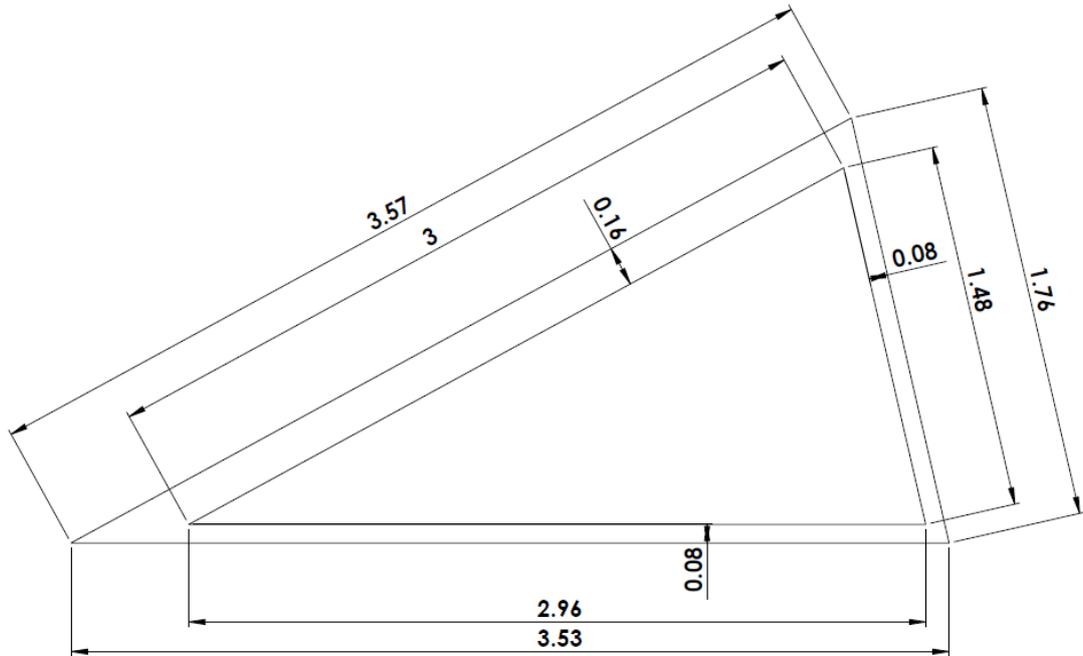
Dimension of cloth sail to cut for Thai sail windmill blade 12B-T0 model
